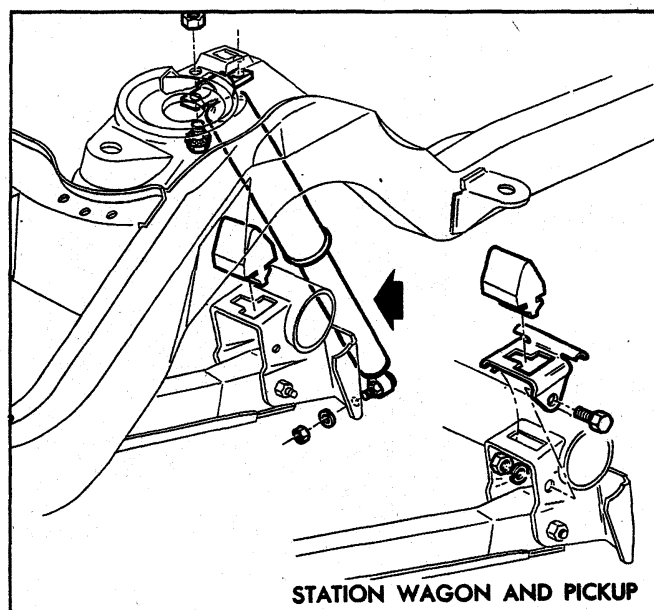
Shock Absorber Mounting—Exploded View (Chevelle)
